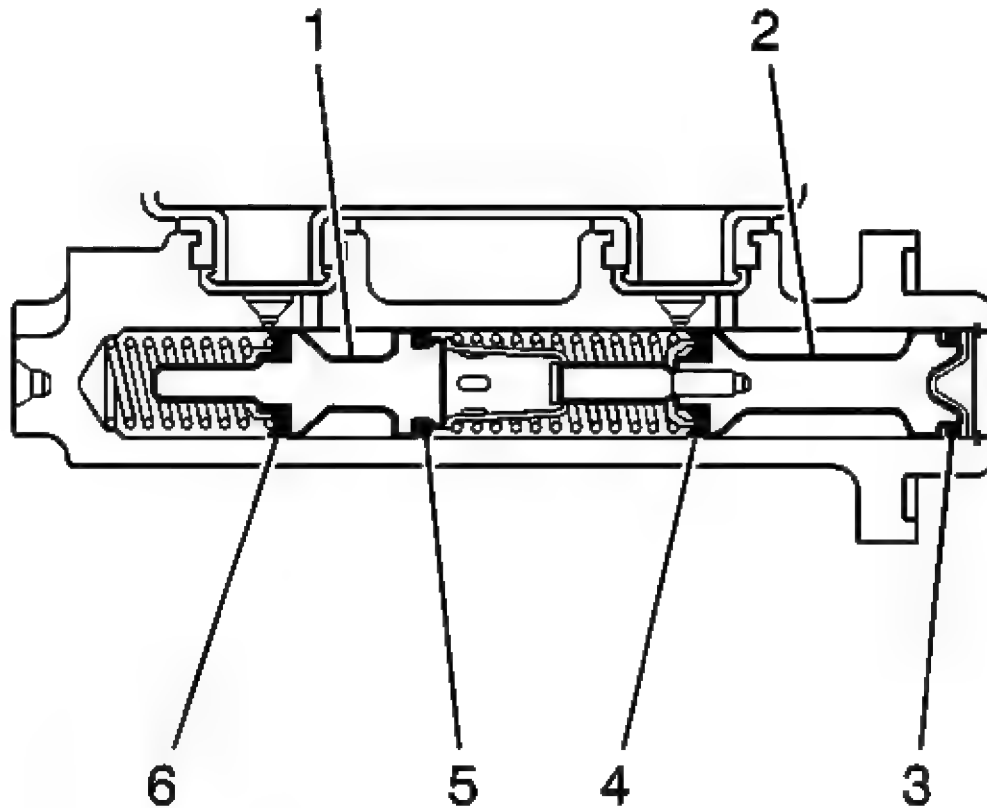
Cross Sectional View Of Brake Master Cylinder
